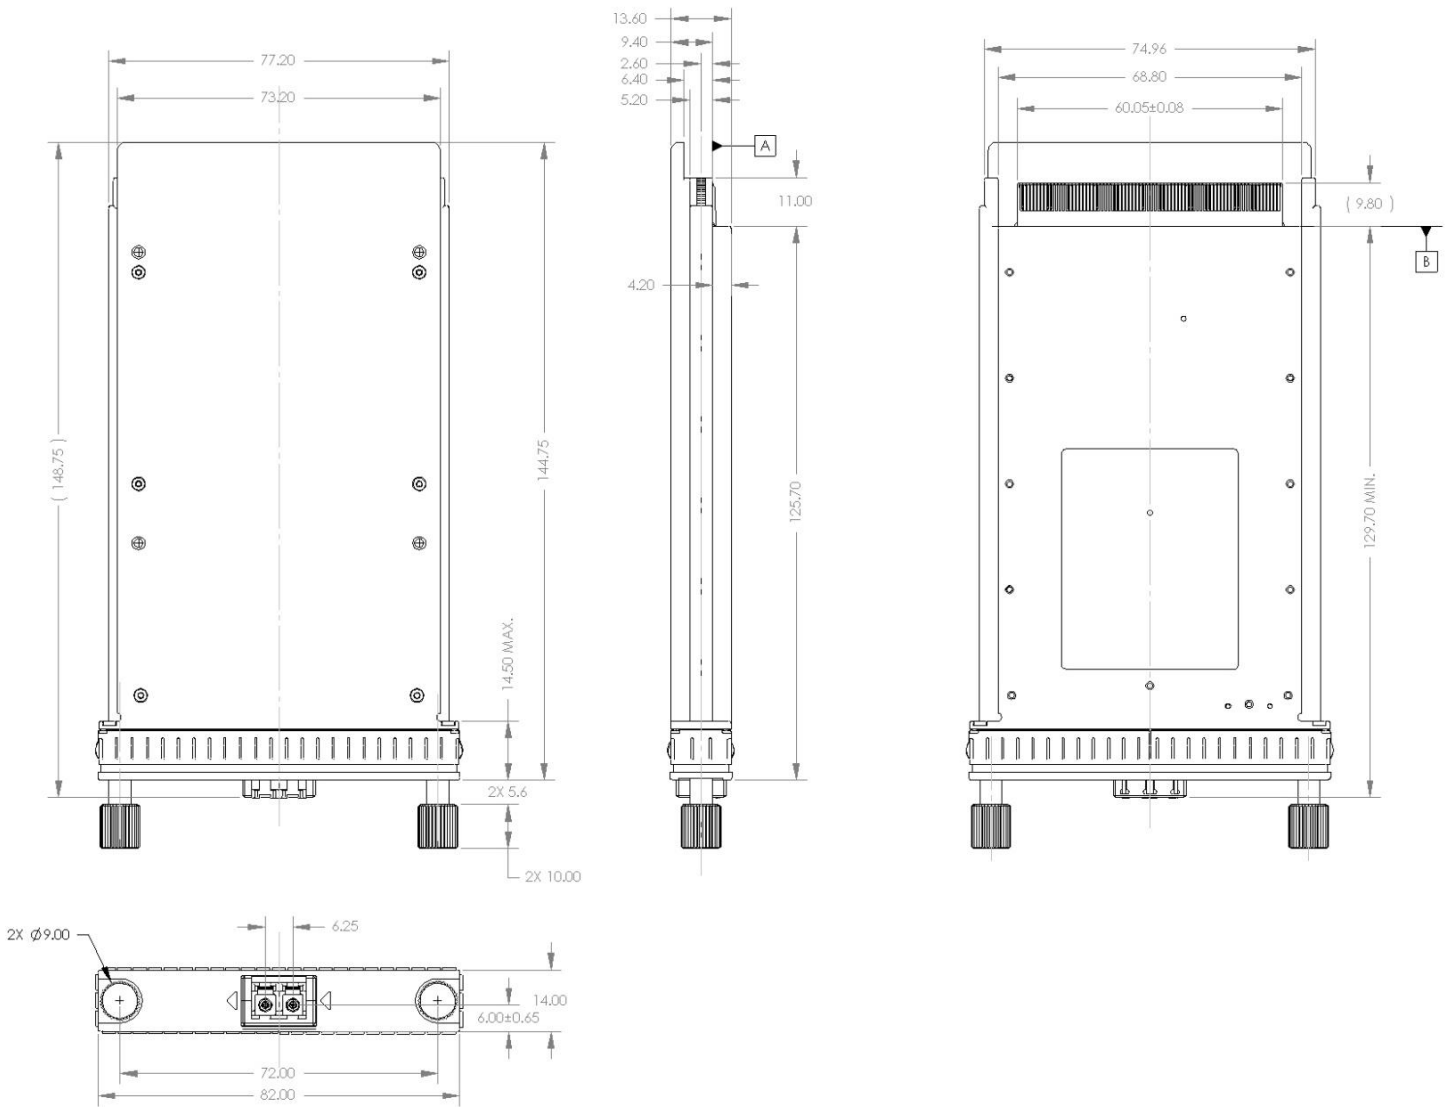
FTLC1183SDNL Mechanical Dimensions.
